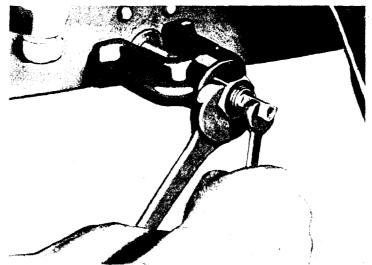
Puller 71953 for Spring Shackle Bracket Bushings
